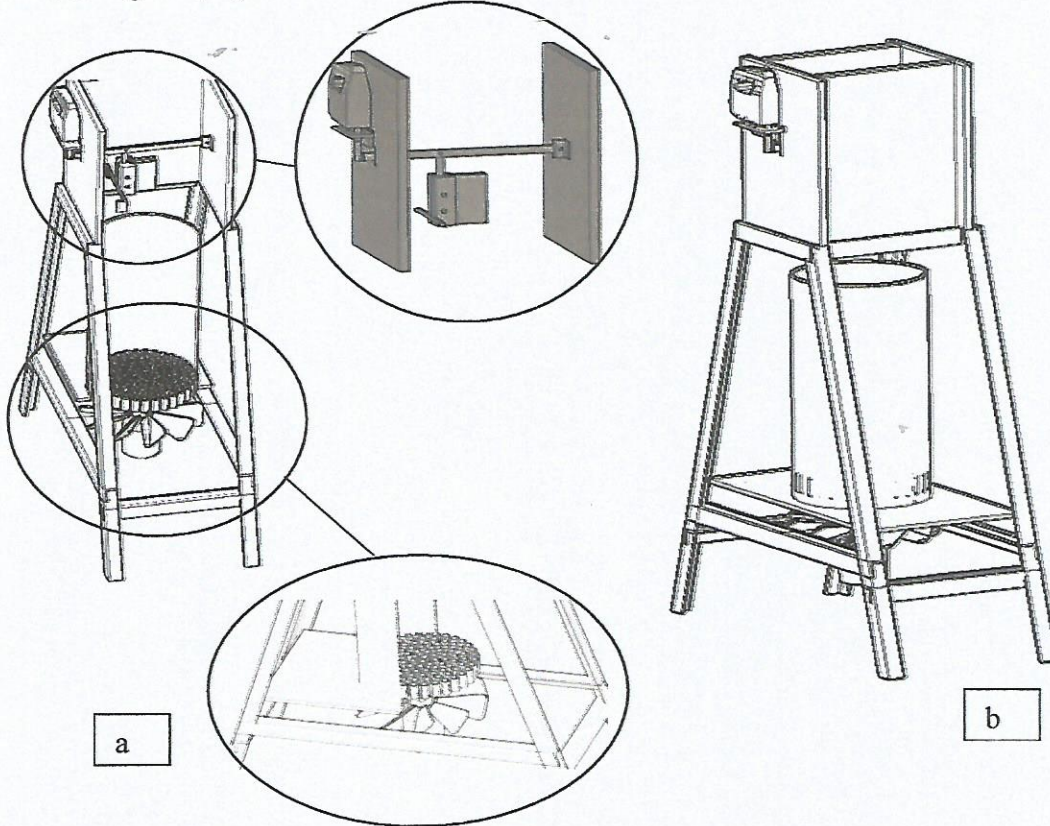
(a) Sectional views showing air passage, pipe and straightener.
